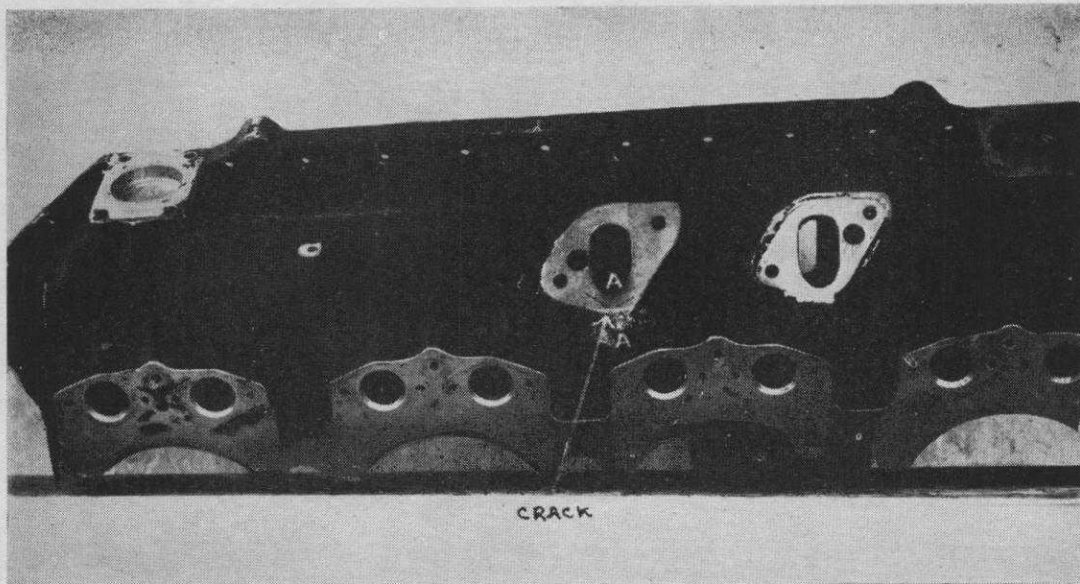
Photograph of an aircraft crank case showing the position of crack at the fuel pump aperture.
